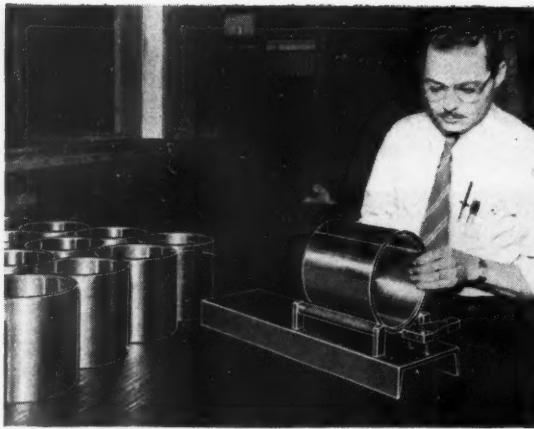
Illustration Showing Use of Device for Checking Length and Skew of Cylindrical Workpieces
